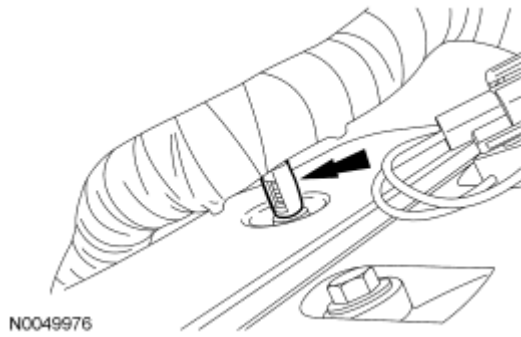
Detaching Wiring Harness From RH Coil-On-Plug Cover Stud Bolt
